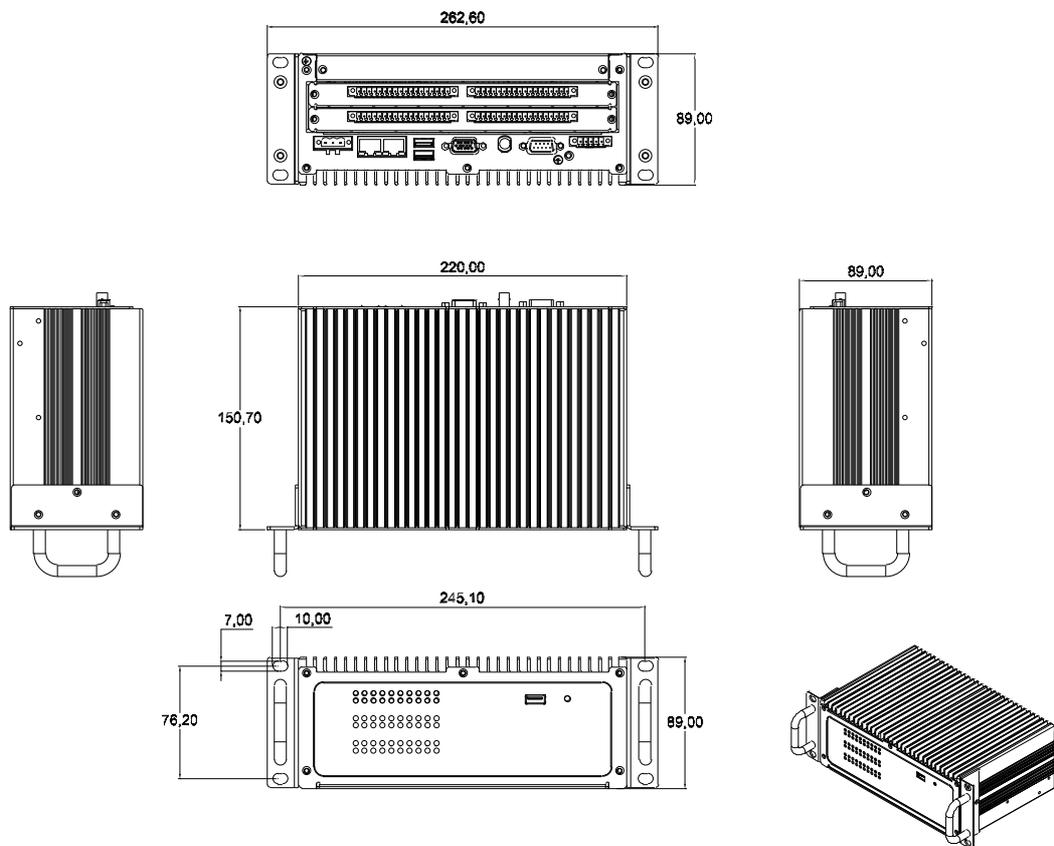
ECU-1871 Chassis Rack-mount mounting size
